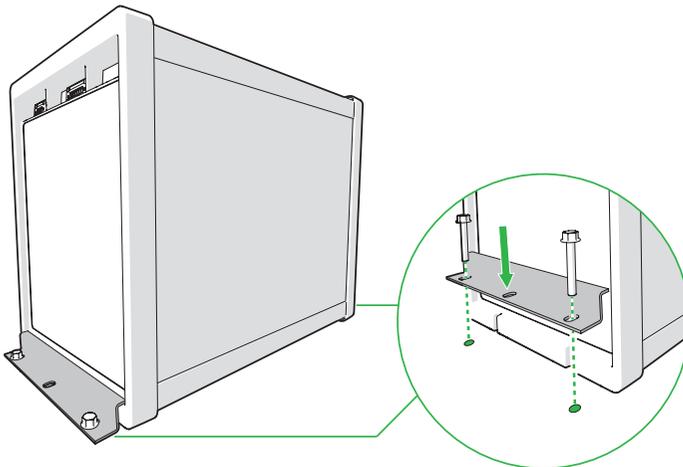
Installing the Li-Ion battery using the Super B mounting brackets
